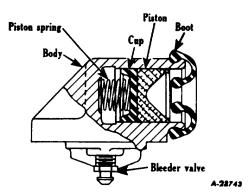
Typical Single Piston Wheel Cylinder (Cross Sectional View).
